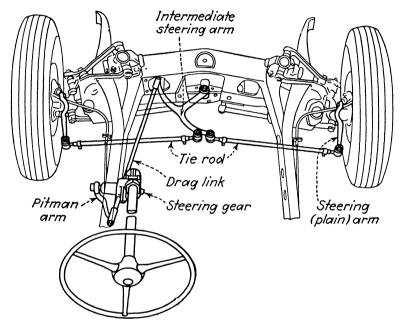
Steering system with center linkage and worm-and-roller steering gear
